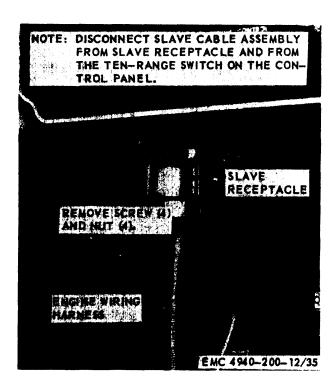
Slave receptacle and slave cable assembly, removal and installation.
